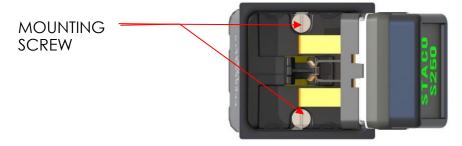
Mounting Screw Location (Drip-Proof Version Shown)
